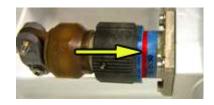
Example of correctly mated connectors using an indicator line and locking pin with inspection hole.
